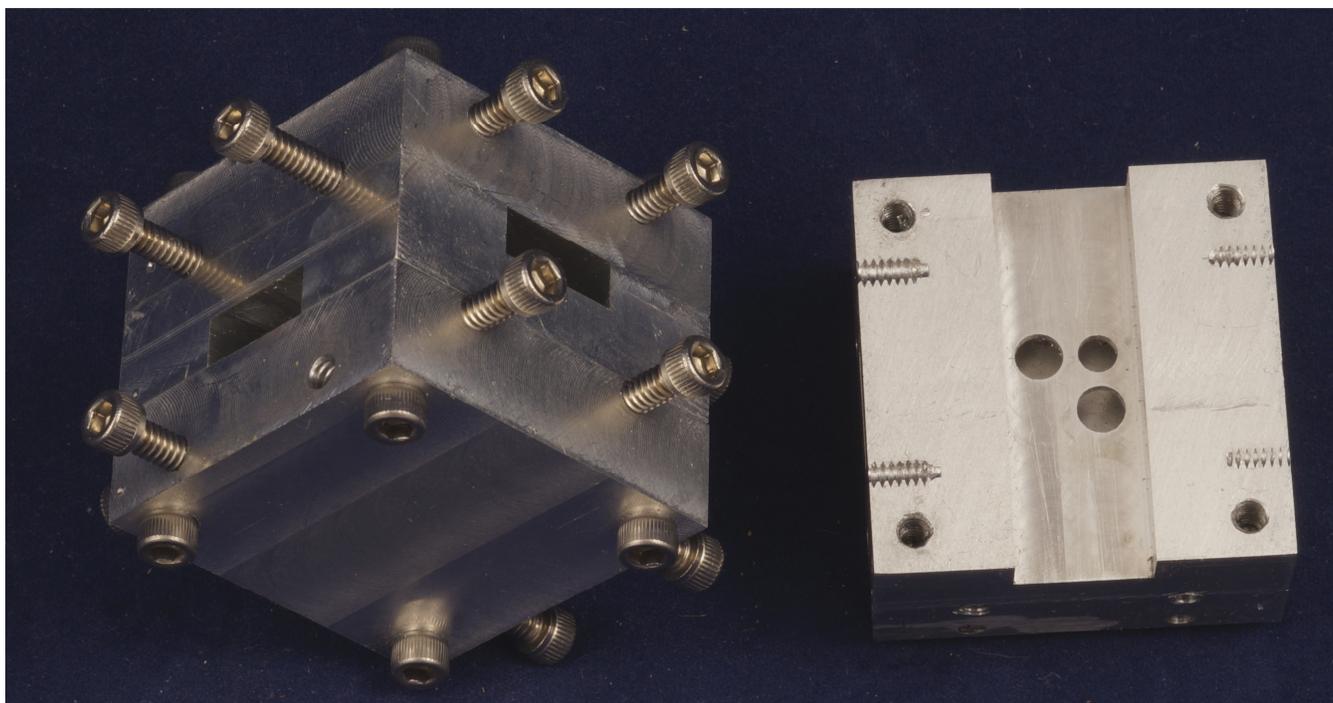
Machined round hole cross-guide coupler for 24 GHz in WR-42 waveguide
